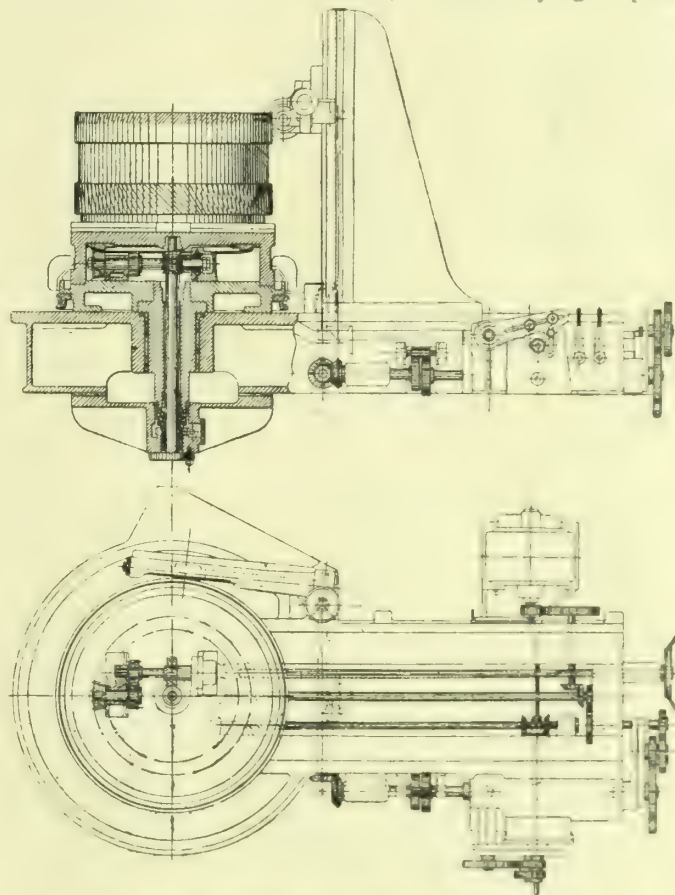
GEAR HOBGING MACHINE WITH CREEPING TABLE.
